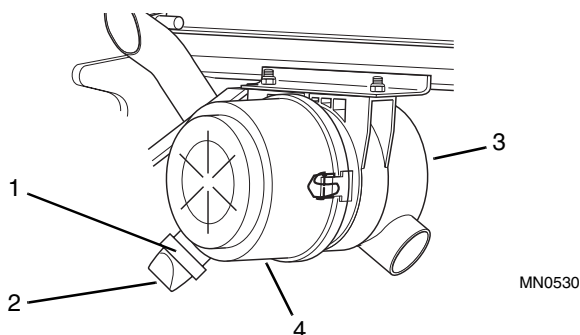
Air Cleaner Vacuator Valve and Housing
